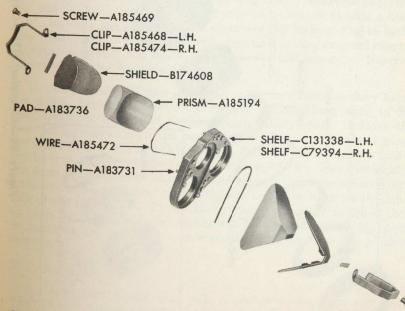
Binocular M13—Prism Shelf Assembly Disassembled
